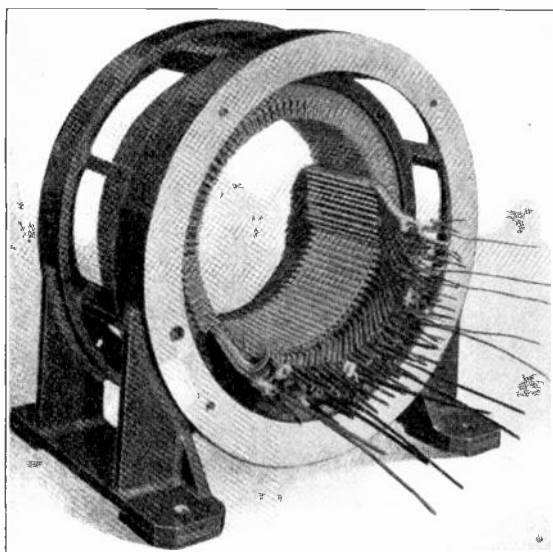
The above photo shows a stator partly wound with factory-made coils. Coils of this type can be purchased ready made from many manufacturers so they can be quickly and conveniently inserted, and speed up repairs of the machines.
